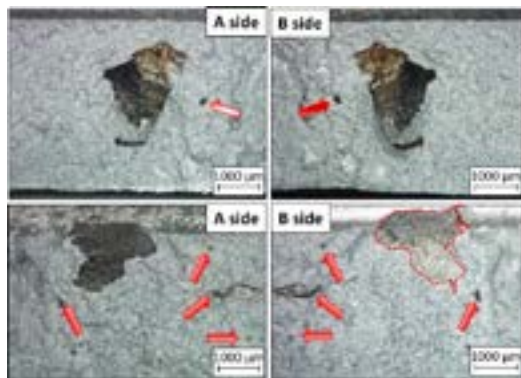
Bifilm defects found on the fracture surfaces of K-mold specimens
